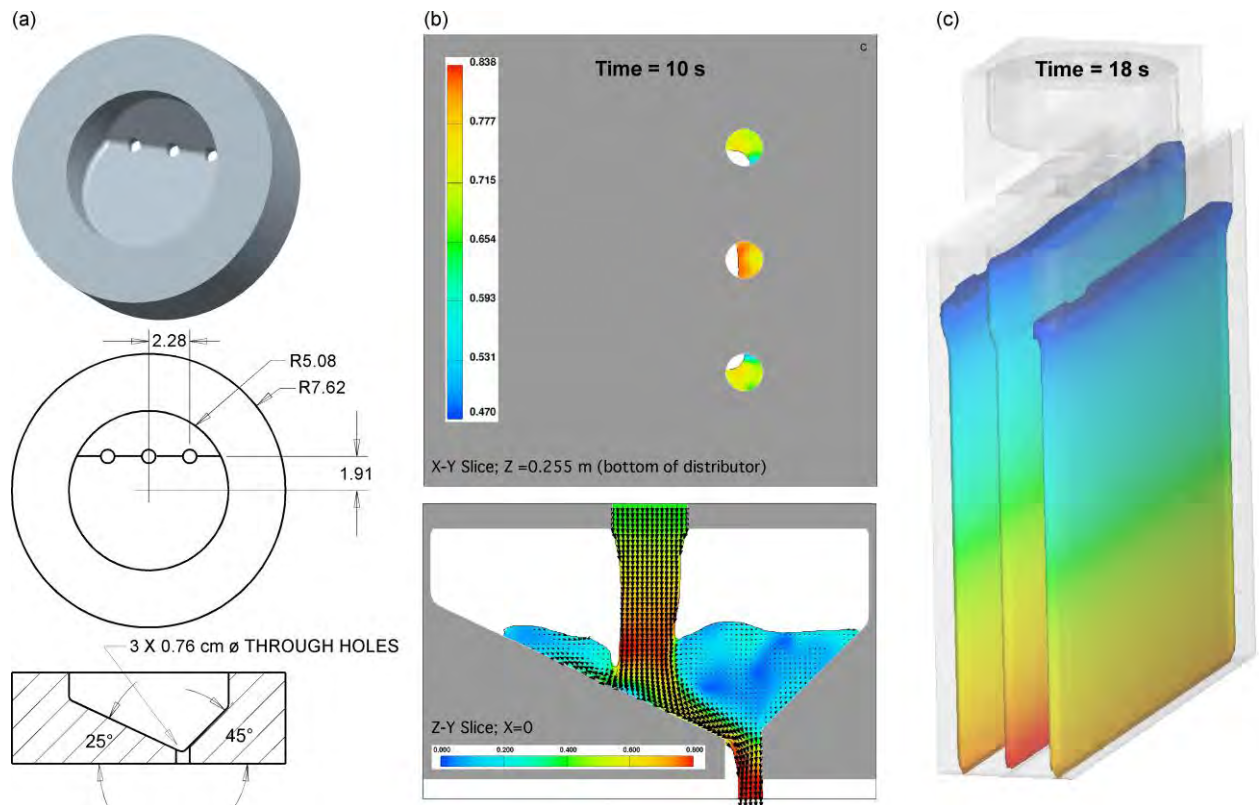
Mold filling simulation of revised mold design with the linear distributor; (a) distributor geometry, (b) sections through the distributor during filling (metal colored by velocity magnitude), and (c) final unequal metal distribution in the three casting cavities.
